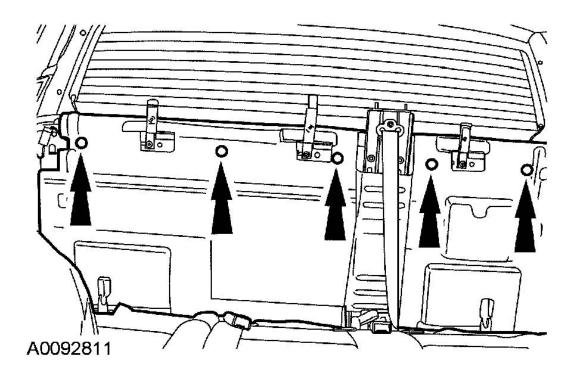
Removing Rear Trim Panel Pin-Type Retainers Courtesy of FORD MOTOR CO.
